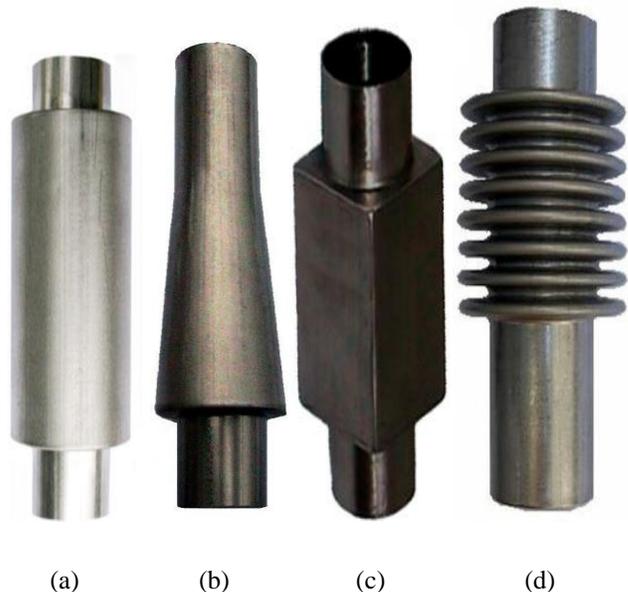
Tube hydroformed parts: (a) cylindrical stepped tube (b) conical stepped tube (c) rectangular stepped tube (d) bellows
